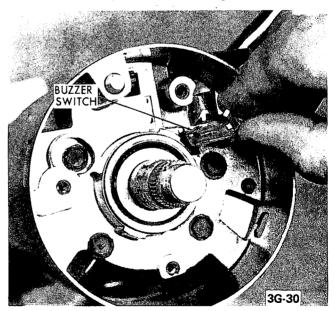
G-96 - Installing Buzzer Switch Spring and Switch
